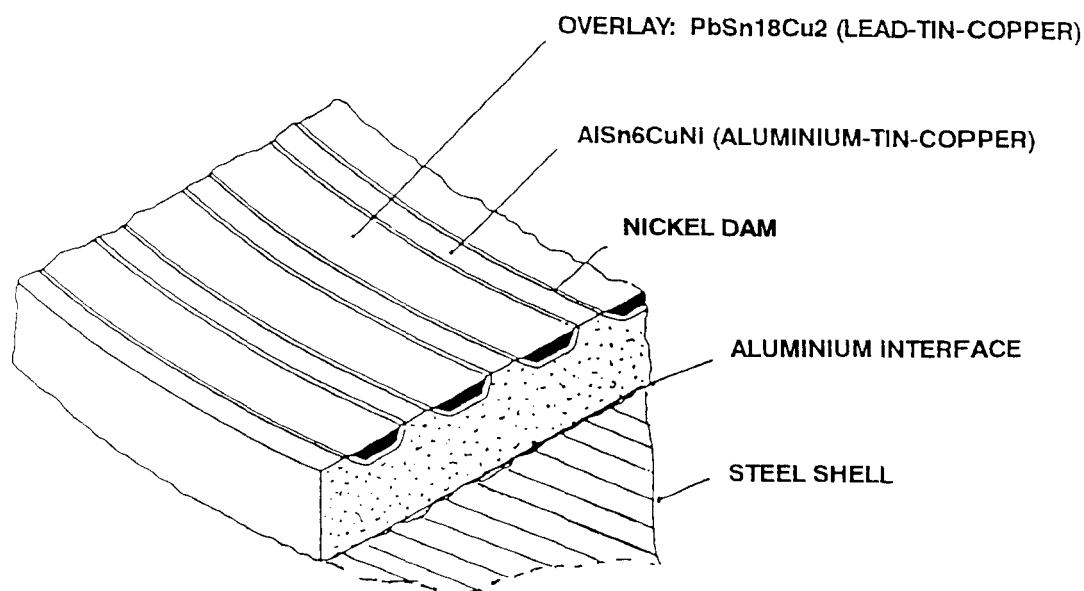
CONSTRUCTION OF RILLENLAGER BEARING
